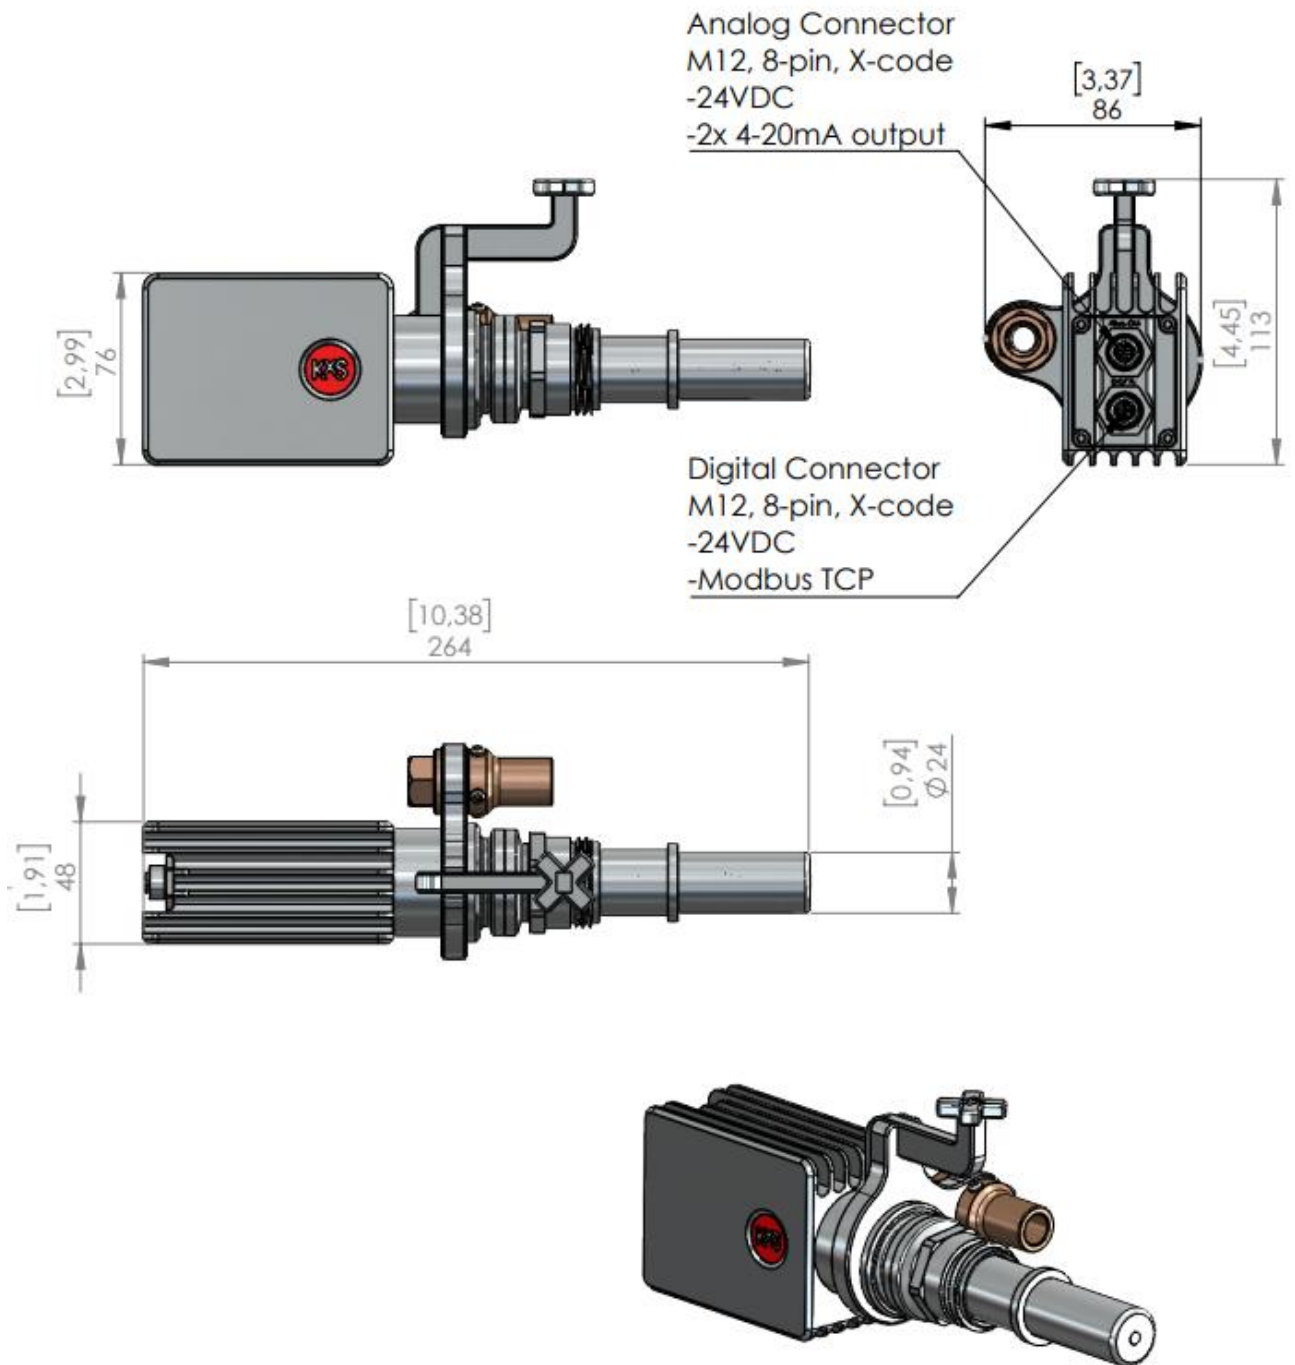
Retractable refractometer DCM-20 PASVE® sensor (Drawing 10526).
